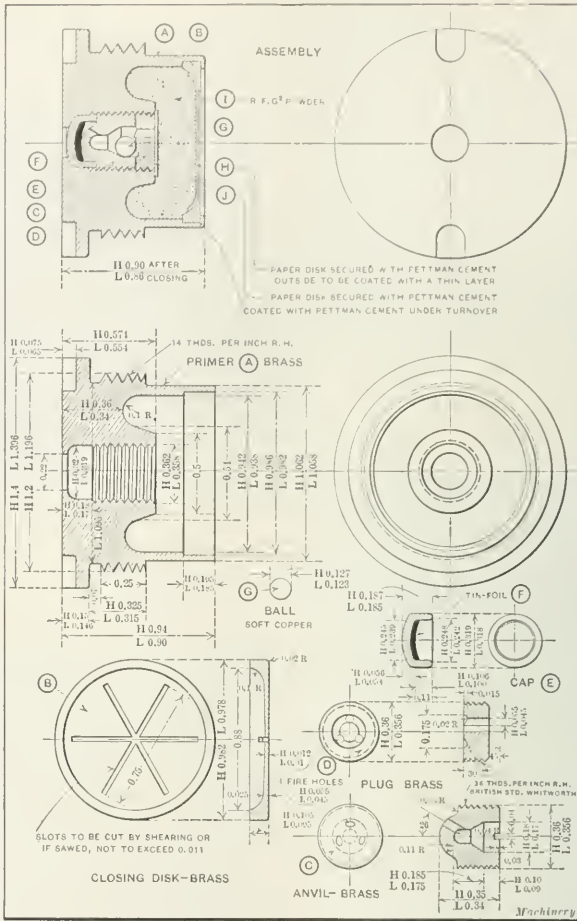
Assembly View and Details of British Cartridge Case Primer
